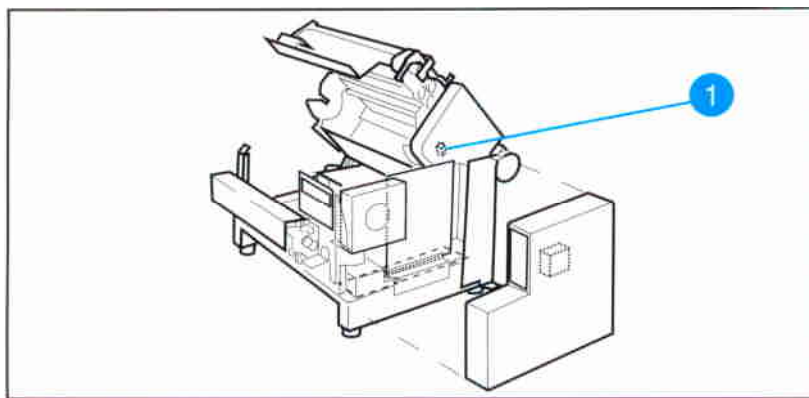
Transfer Assembly Cam Home Position Sensor
